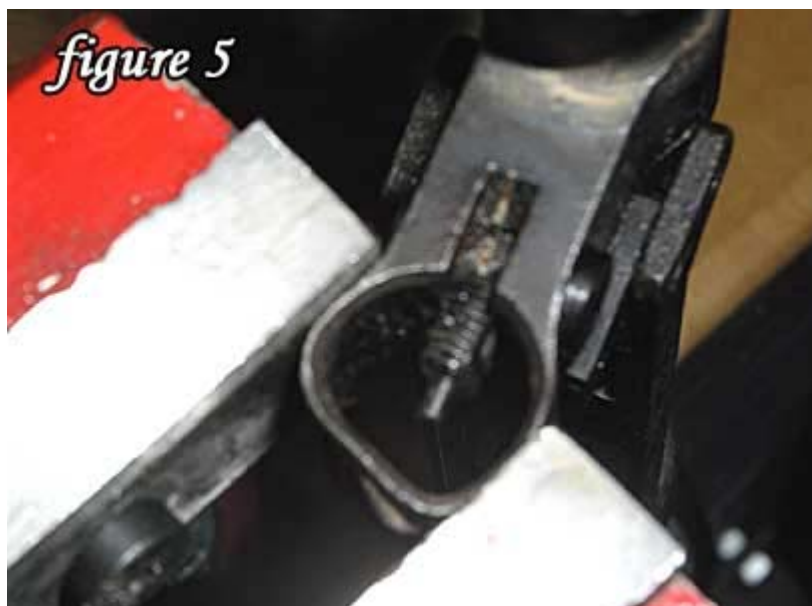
Use the vise to bend the hood just enough to be able to remove the blade through top hole.
